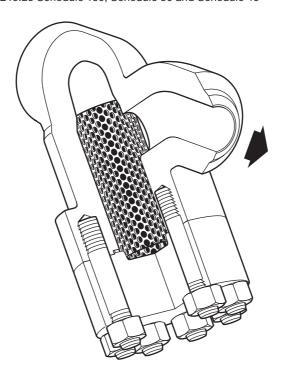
Fig 18HP, alloy steel, butt weld, Y-type strainer with flanged screen cover
